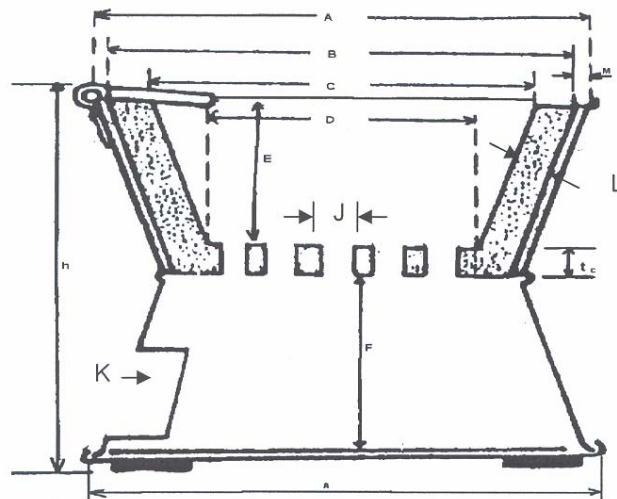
Cross sectional view of the charcoal stove (view x-x)
